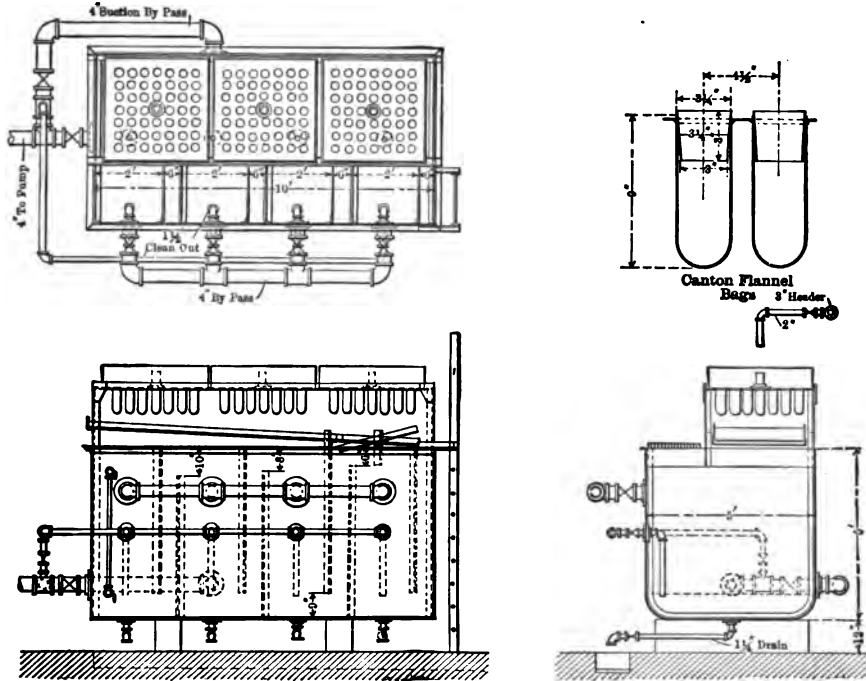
Layout of an Oil Filter Tank System, similar to which some are installed at the 59th St. and 74th St. Plants, New York. (*Power.*)
